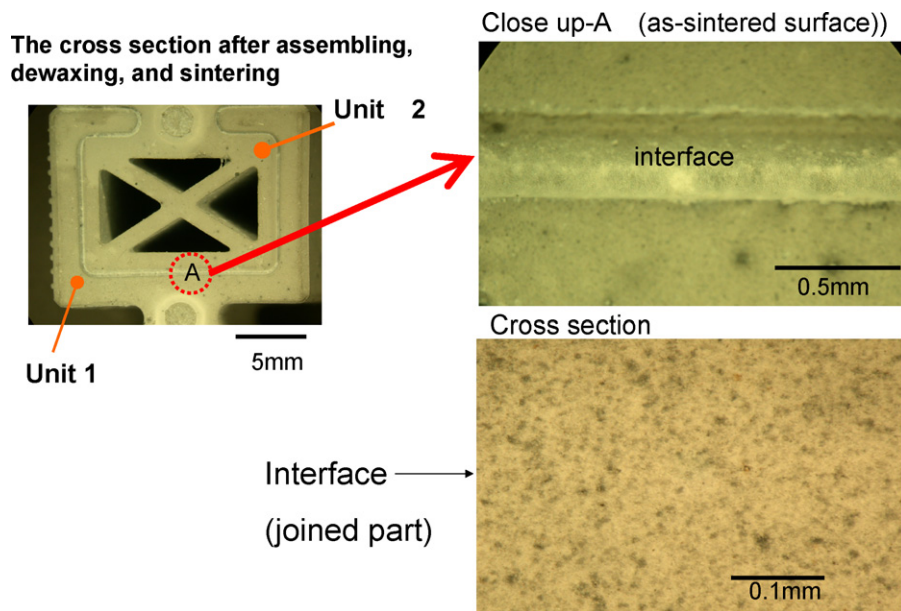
The appearance and the cross-section of the assembly after sintering.
